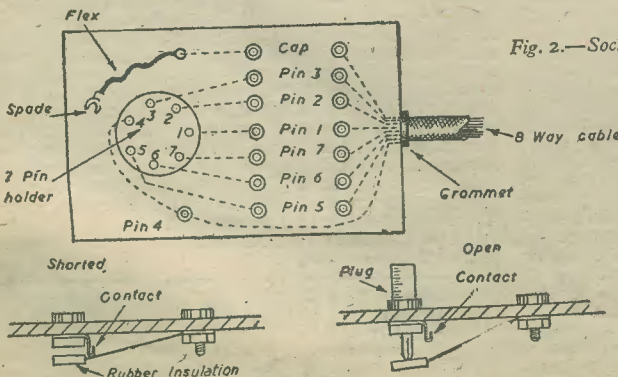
Plan of panel, and details of contacts for a simple test-board.
